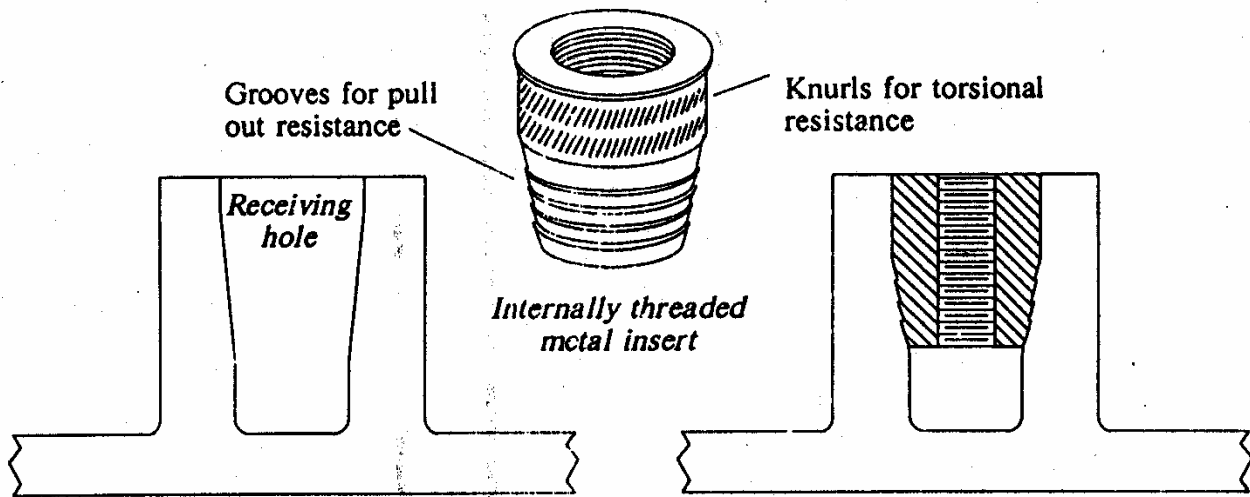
Ultrasonic welding equipment can be used to install specially designed metal inserts into a molded plastic boss.
